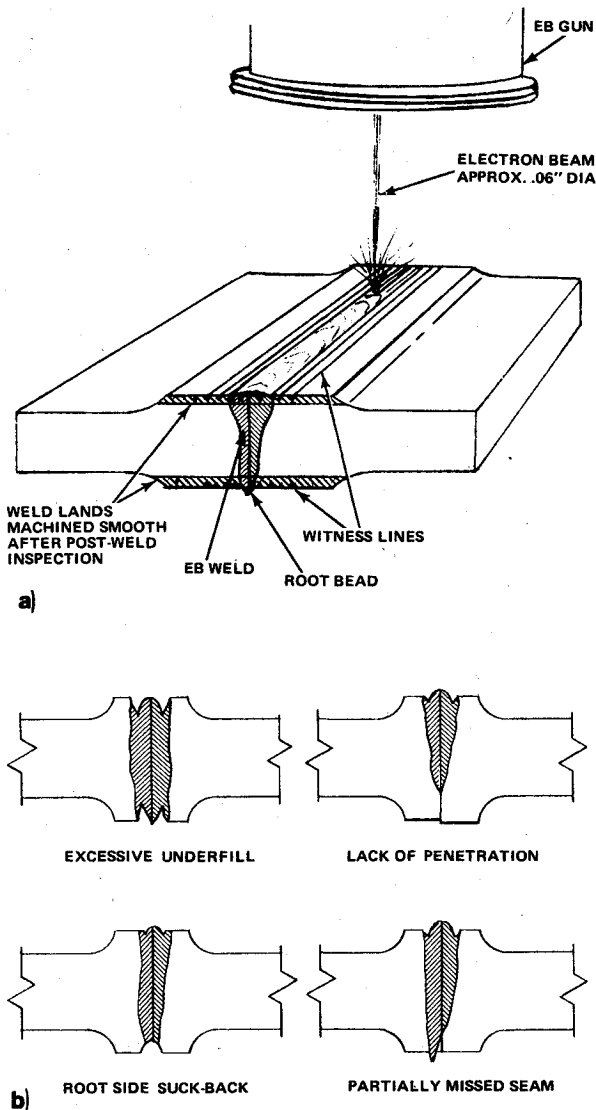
Details of EB welding and defects screened by visual inspection techniques.
